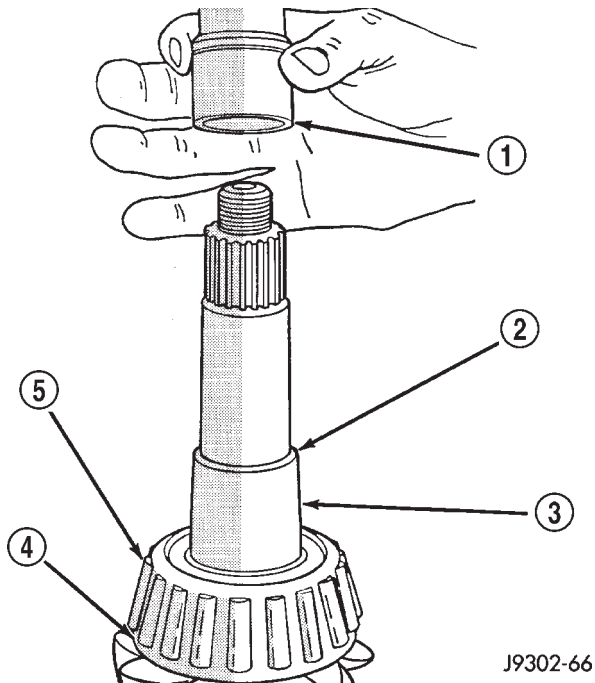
COLLAPSIBLE PRELOAD SPACER
